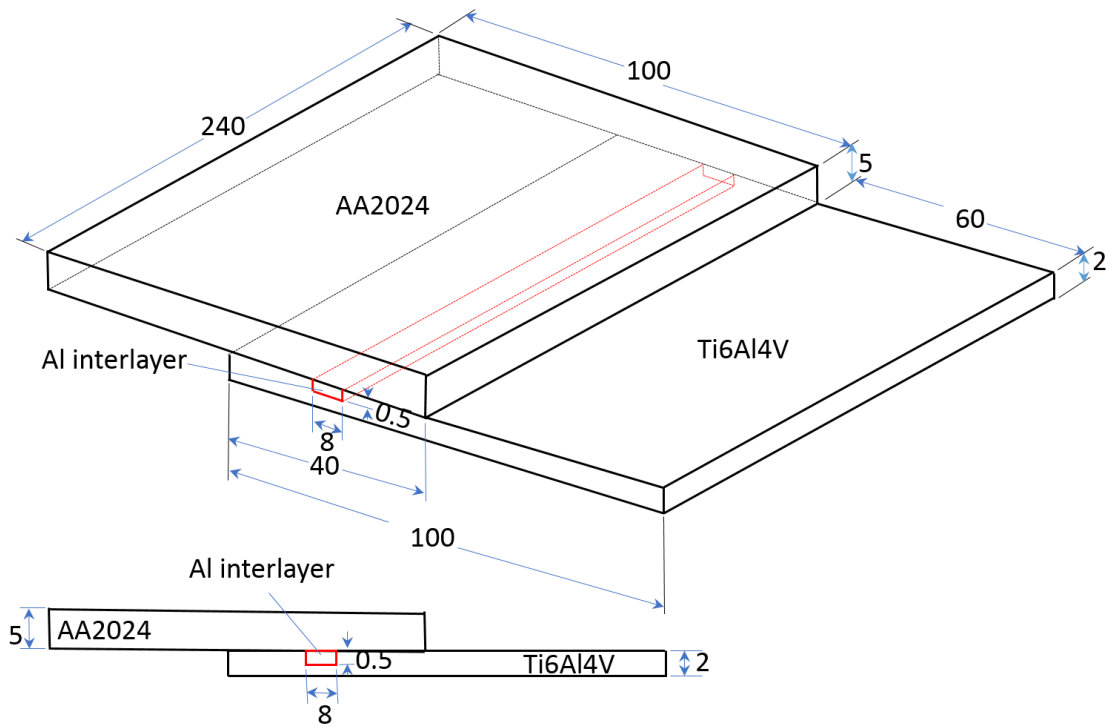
Experimental series 3 with Al interlayer inserted into a rectangular groove machined on the 2mm Ti6Al4V. The plate set up is illustration on the top while the wire cut FSLW fatigue test specimen is shown at the bottom.
